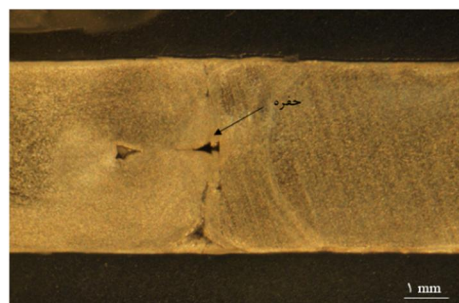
Welding macrostructure performed at a speed of 750 rpm with the help of Bobbin tool made from hot-worked steel H13
